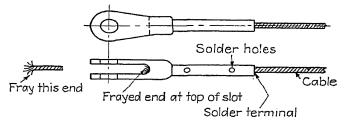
Solder terminal. Insert the free end of the cable in the terminal, fray it, and dip the whole terminal in a solder pot. After it has remained a sufficient time, remove and wipe off all excess solder with a rag.
